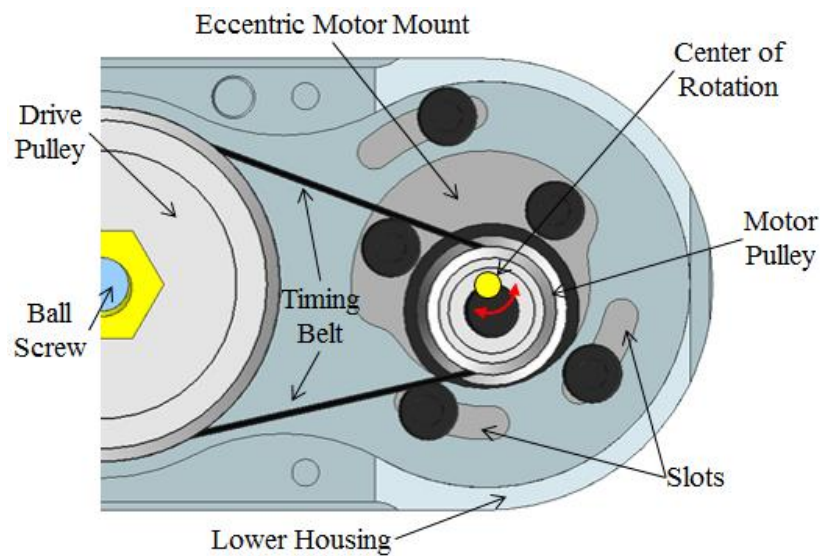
Eccentric motor mount for belt tensioning (top view of bearing housing).
